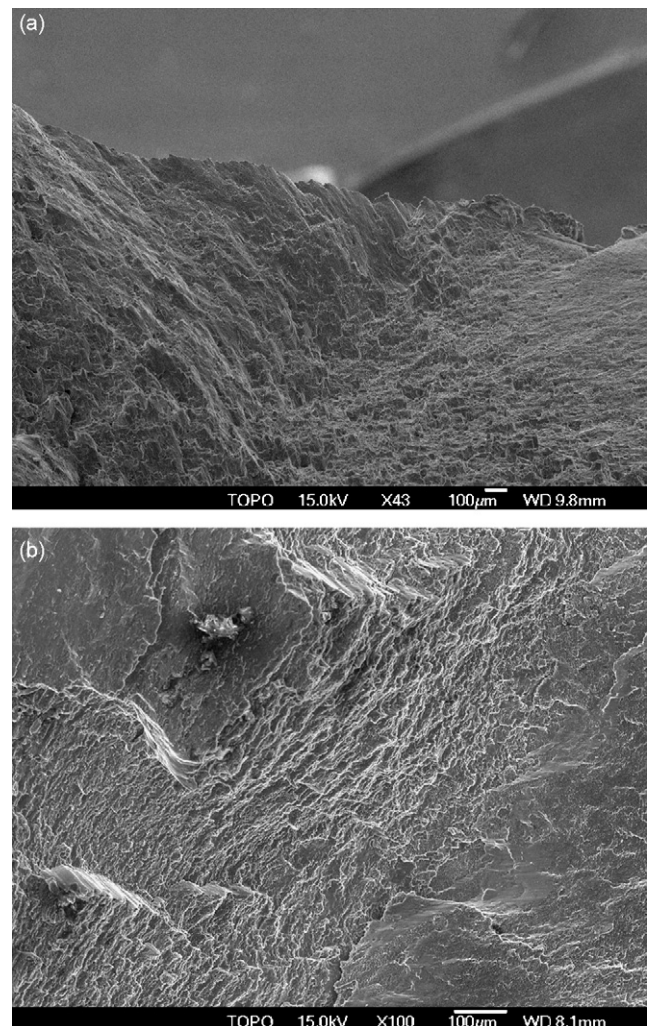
Fracture surfaces of the fatigue specimens (welding speed of 115 mm/min) tested at 100 MPa (a) and 95 MPa (b).
